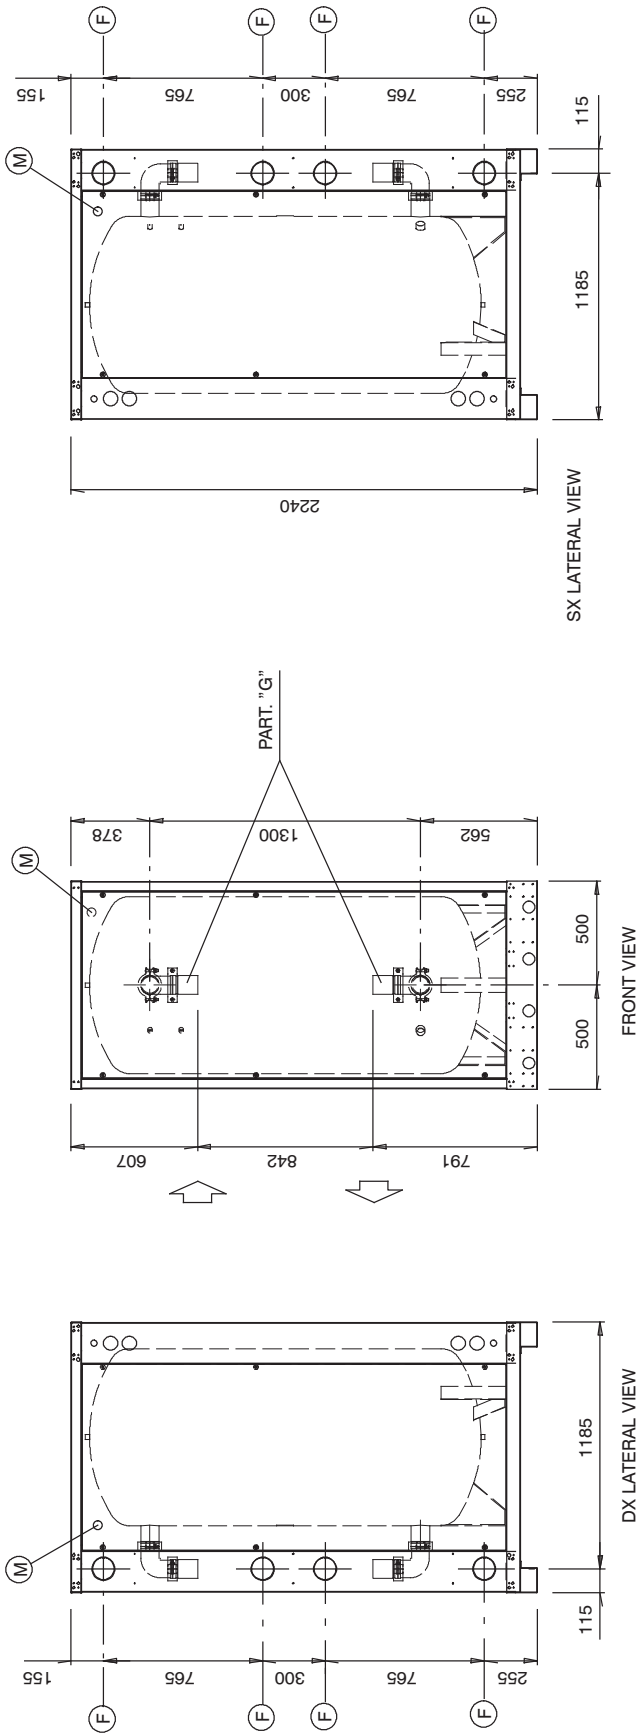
Tank overall dimensions (supply not mounted on unit)
